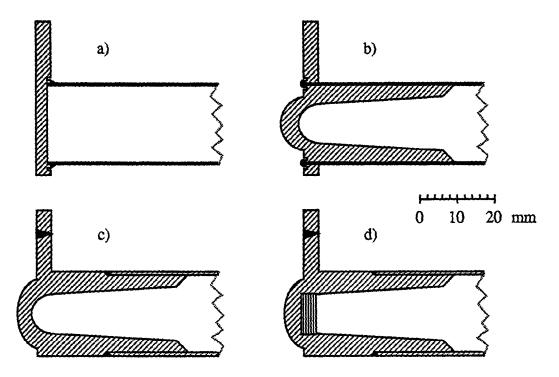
Proton beam windows of the liquid metal containers. a) standard window with TIG-welds and 5/10 mm tube. b) Protected TIG-weld. c) Electron beam weld protected from a direct contact with the melt by a -2/100 tight fit. d) Protected e-beam welds, in addition a 4 mm pyrocarbon disk is tightly fitted under vacuum inside of the proton beam window.
